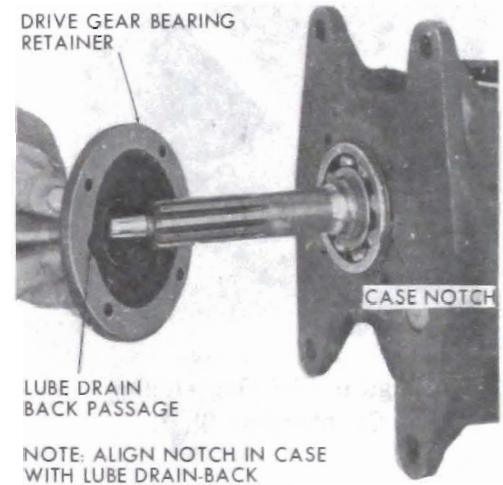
Installing Main Drive Gear Bearing Retainer
